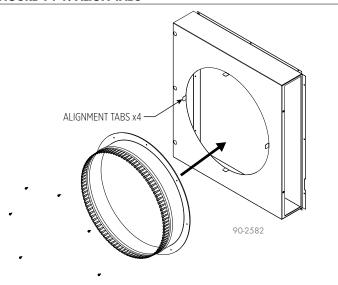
ATTACH ASSEMBLED DUCT HOUSING
